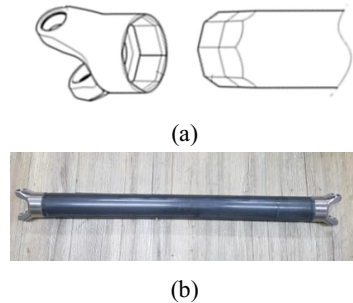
(a) Tube yoke and tube, (b) Universal joint for a propeller shaft
